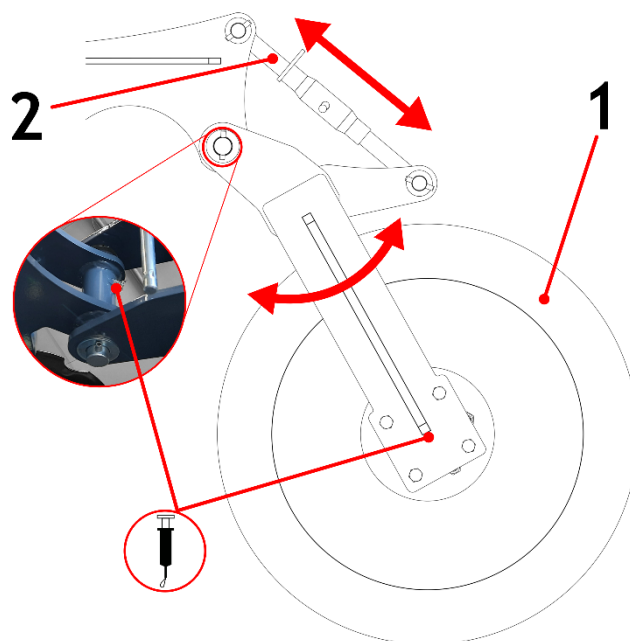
General construction of the support wheel with lubrication points (1 - wheel with hub, 2 - turnbuckle)
